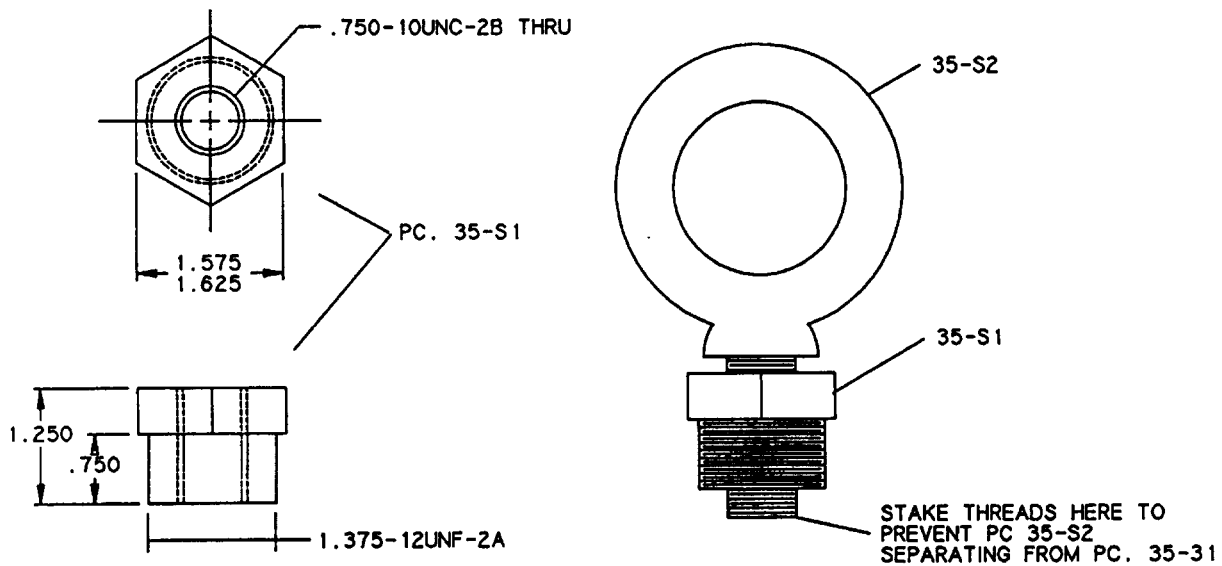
Accumulator Lifting Devices (Sheet 1 of 2)
